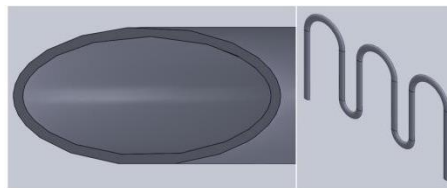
Isometric view and cross section of ellipse(2,4) pipe.
